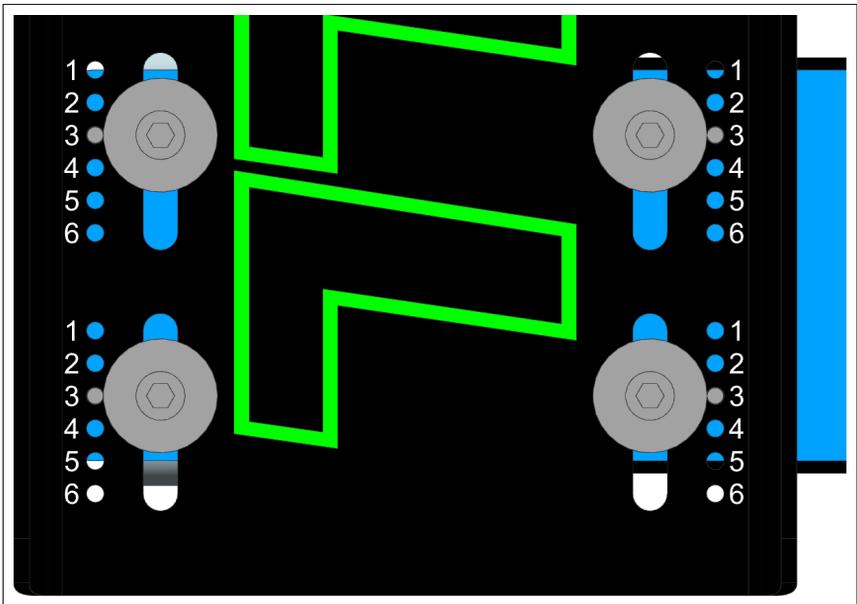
Bottom motor position numbering system. Motor sled locating pins shown in position 3 of 6. Motor sled shown in blue for clarity.
